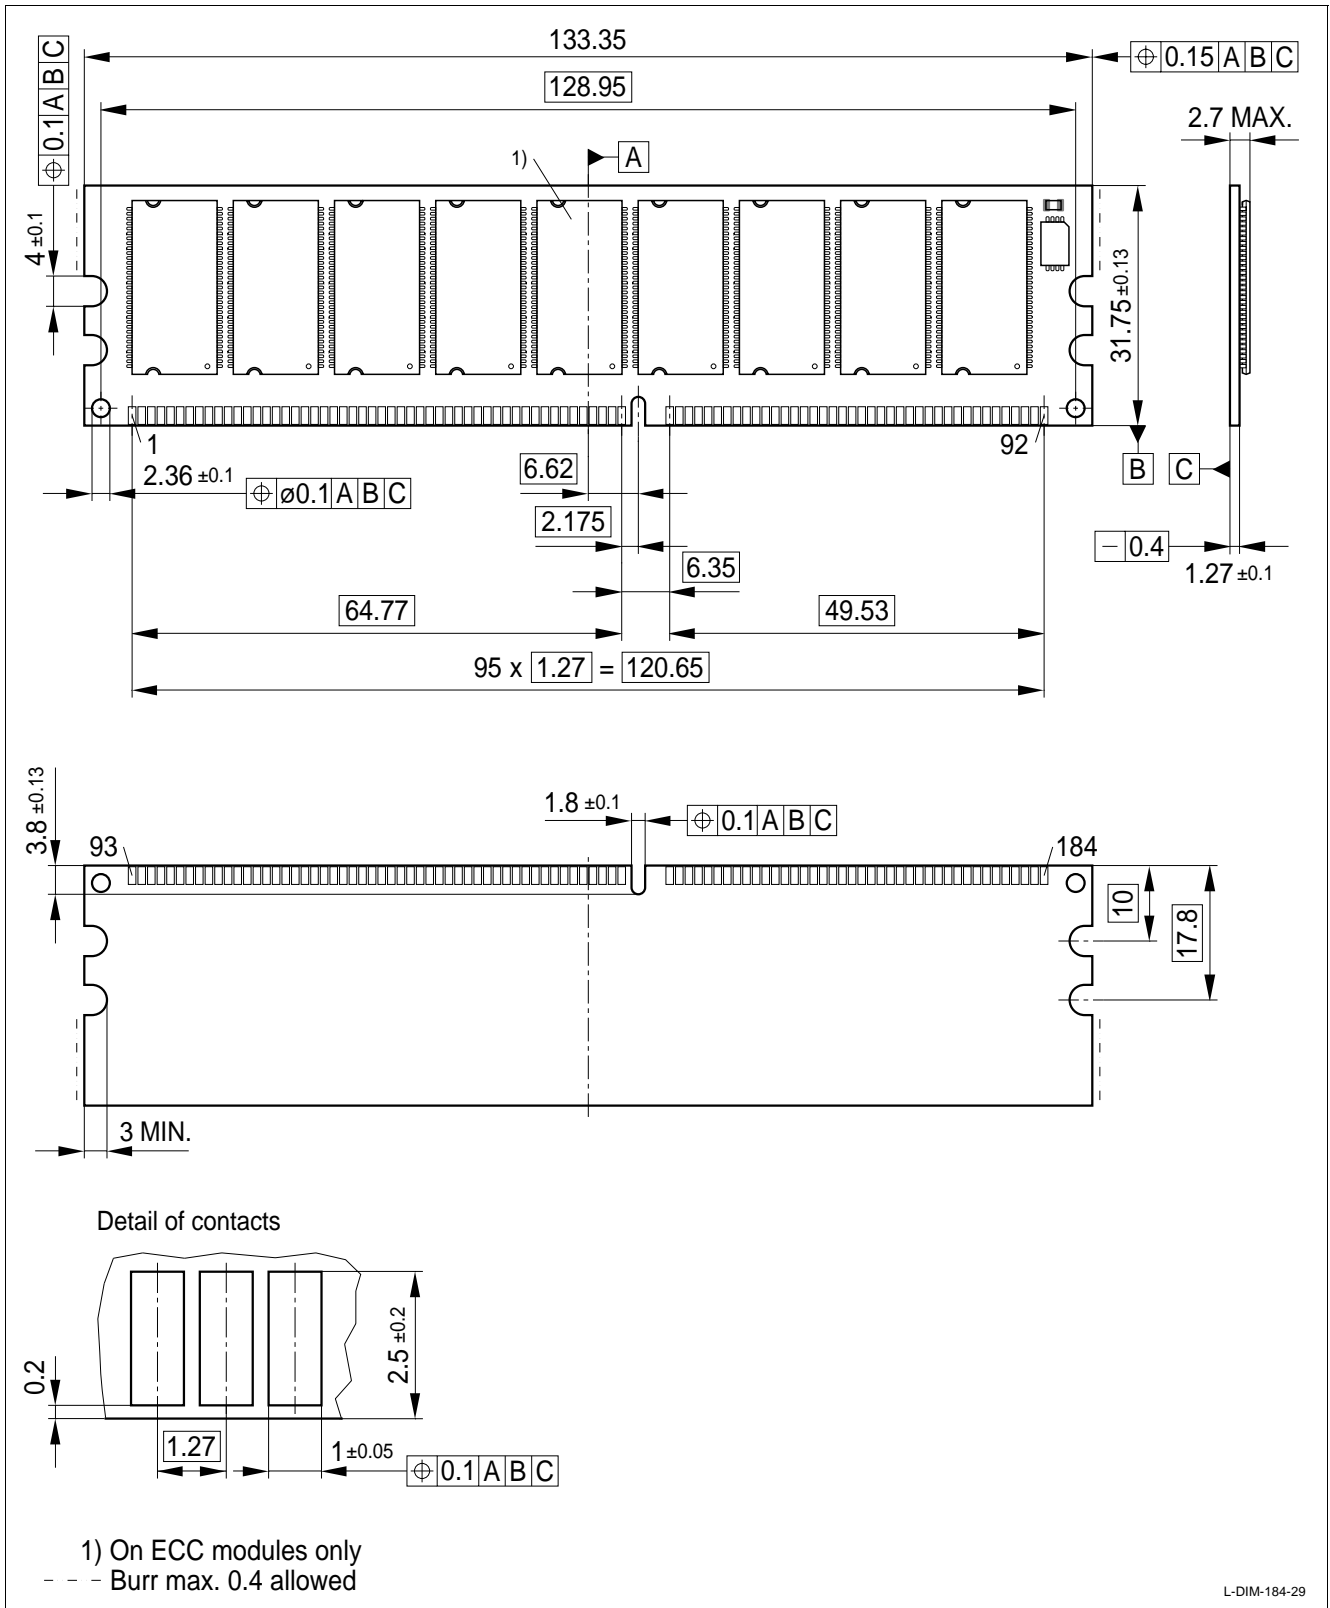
Package Outline - Raw Card A (256 MByte, 1 Rank Module, -7 and -8)
